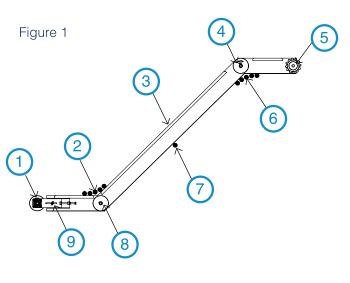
Demonstrates a typical Z - elevator conveyor construction showing a Slide Bed made from UHMW .
